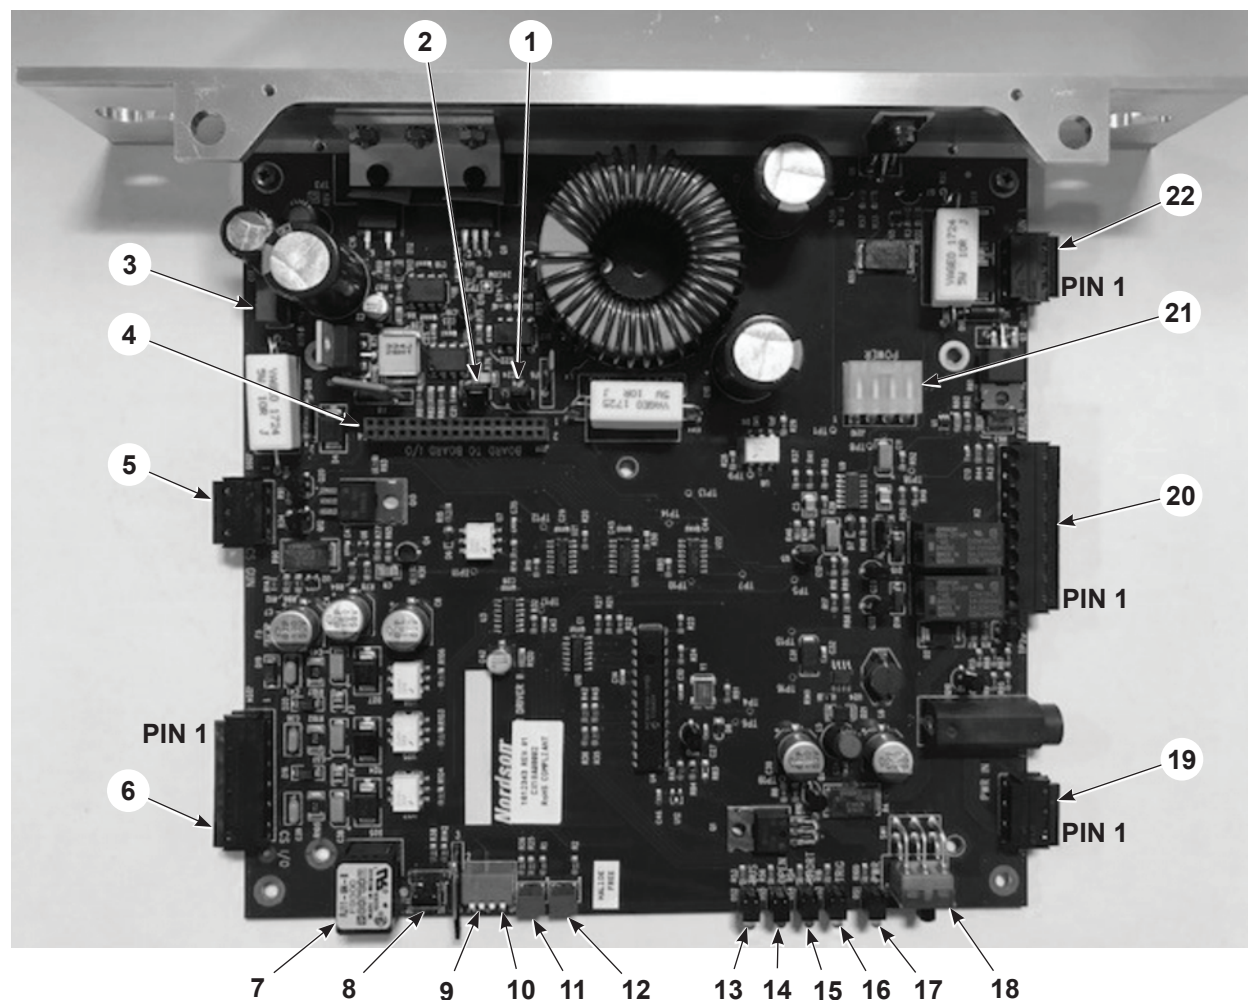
Spray Controller Driver Board Switches and Jumper Settings
